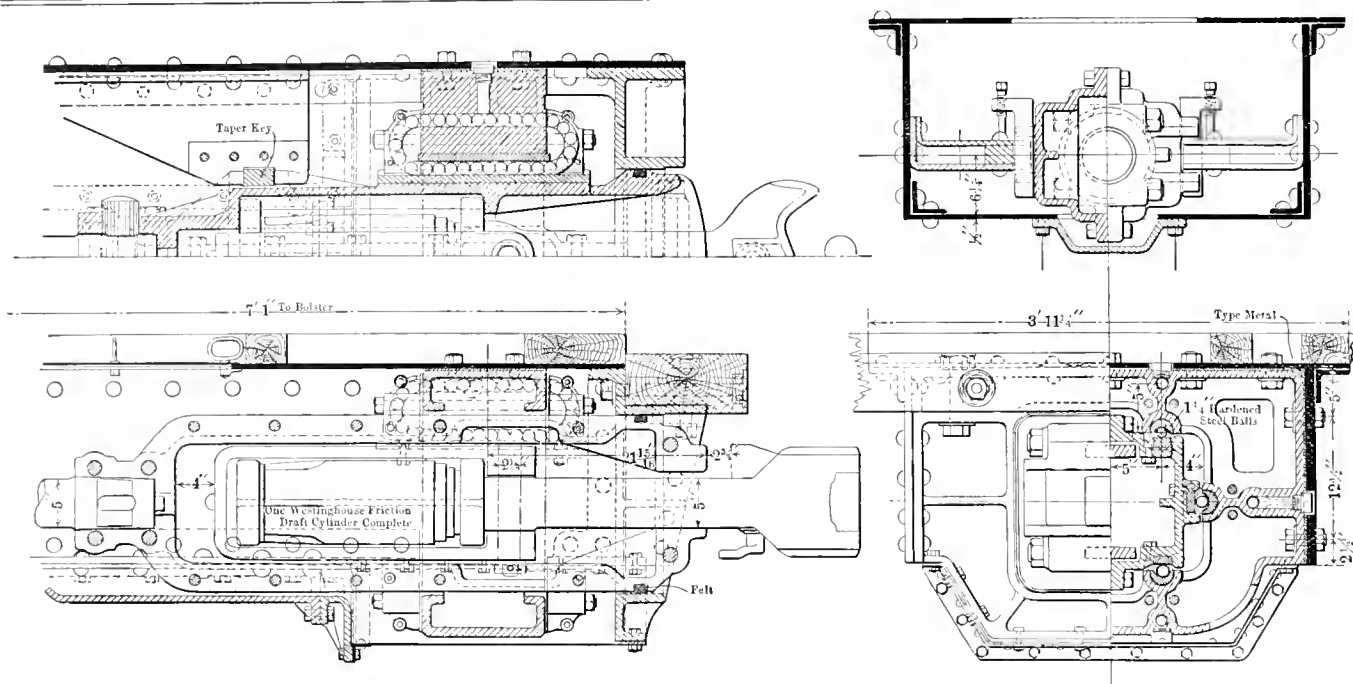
DRAFT GEAR HOUSING AND END OF CENTER SILL—PENNSYLVANIA R. R. DYNAMOMETER CAR.
